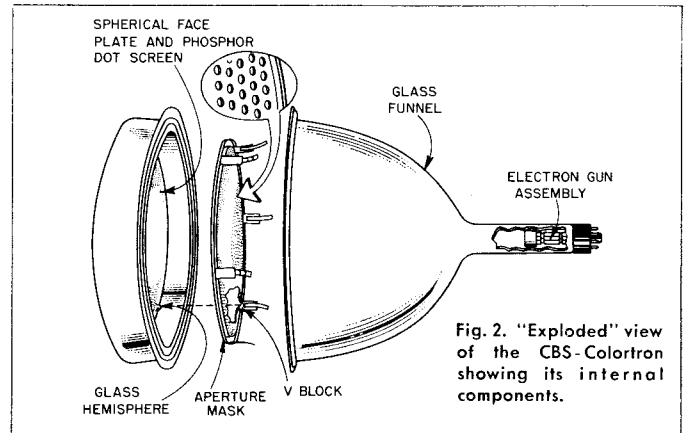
"Exploded" view of the CBS-Colortron showing its internal components.
